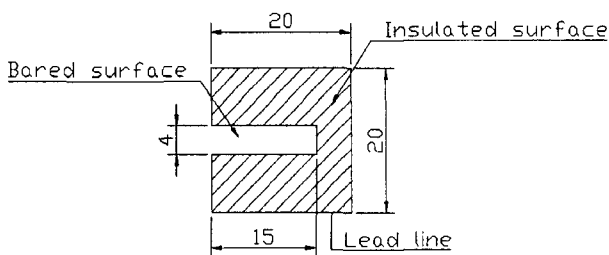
Shape and dimension of crevice corrosion test specimen for polarization test(unit:mm).
